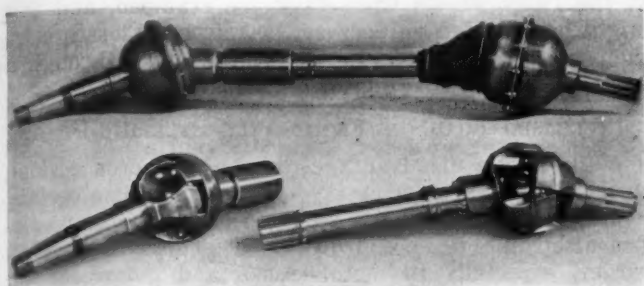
WEISS FRONT-DRIVE UNIVERSAL-JOINTS AND SHAFT ASSEMBLY
